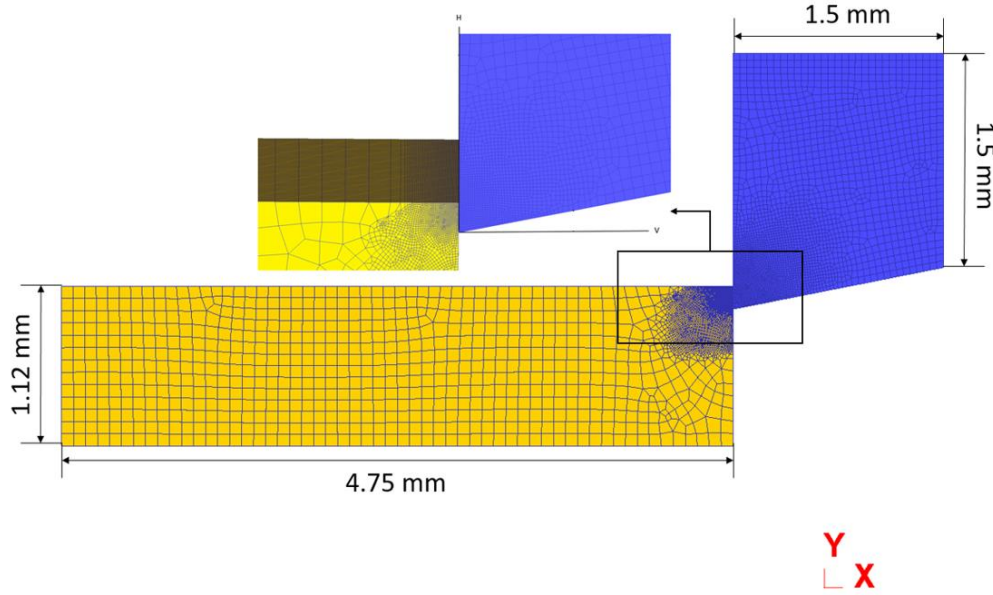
The geometry and dimensions of the tool and workpiece in FE modeling.
